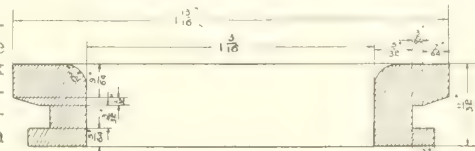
C.P.R. Standard Air Brake Hose Gasket.
